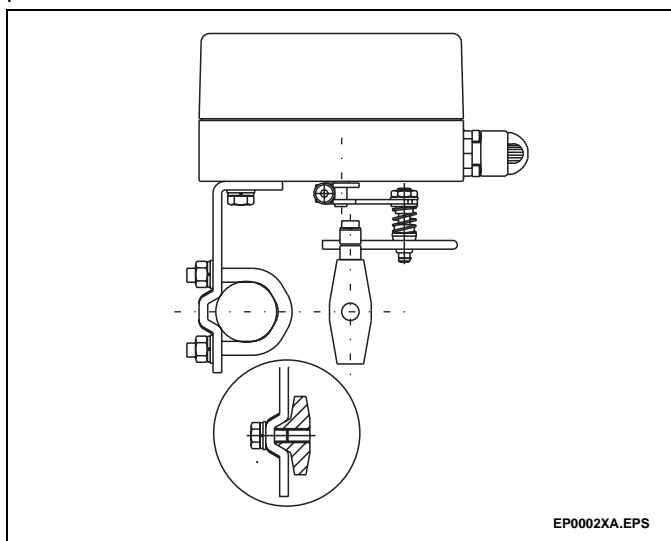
Mounting to linear actuators to DIN/IEC 534
